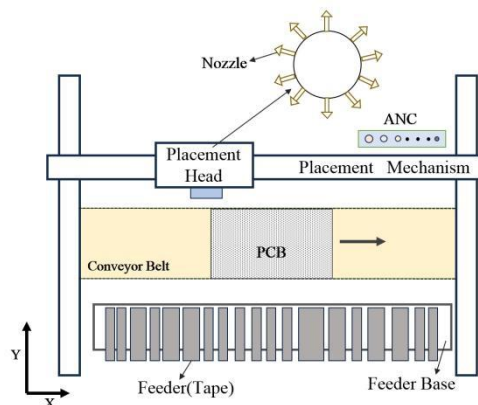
Schematic Diagram of Vertical Rotary Pick-and-Place Machine
